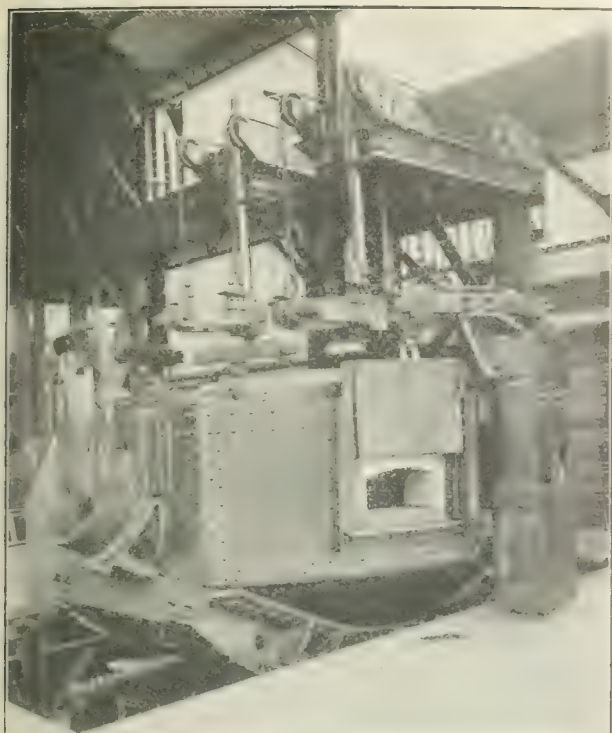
Side View Showing One of Five Doors, Also Method of Supporting Electrodes.
